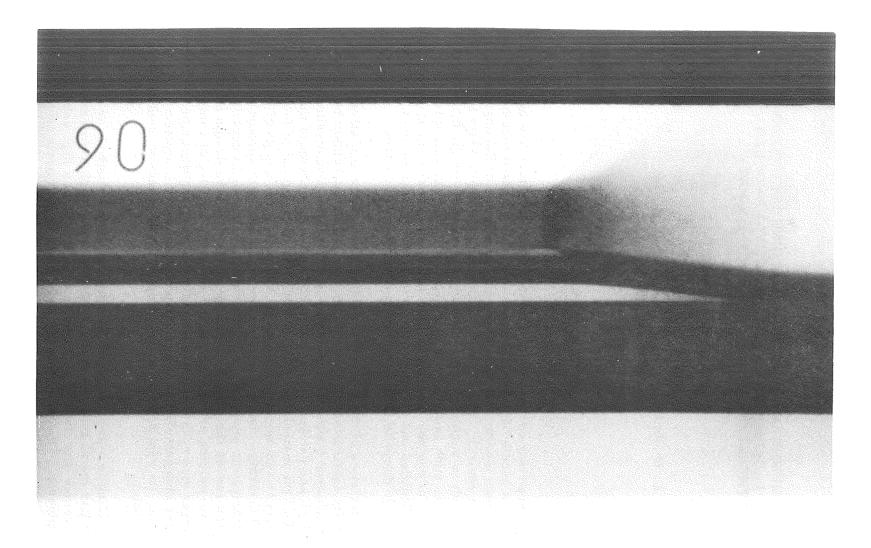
FLASH X-RAY SHADOWGRAPH SHOWING THE WELDING OF FLAT PLATES
